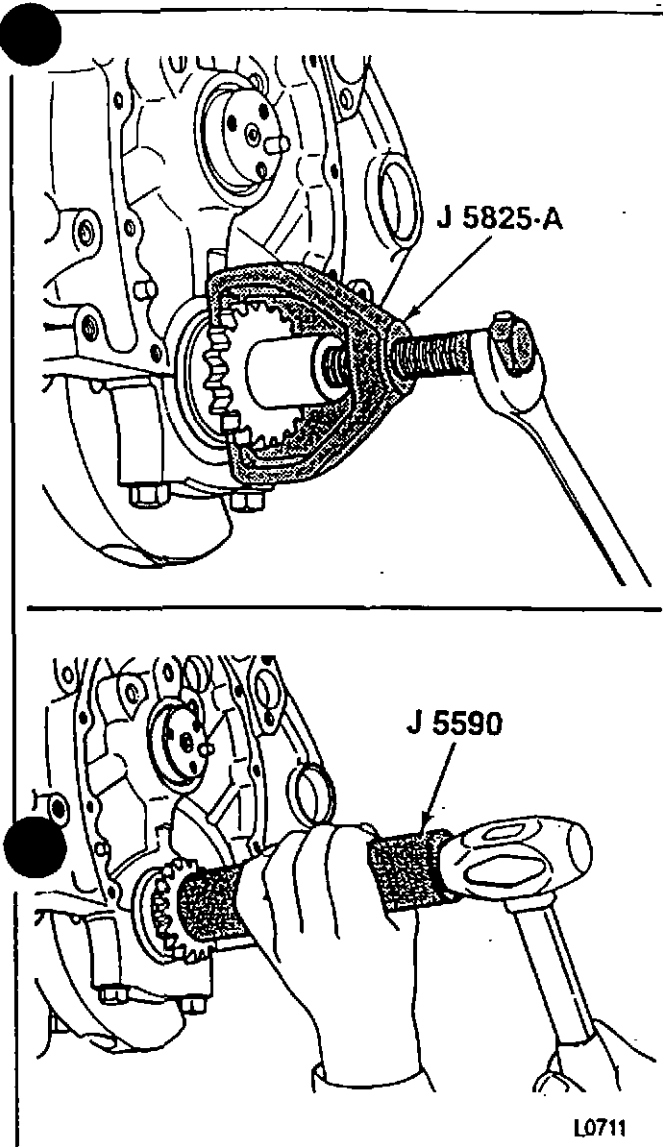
Crankshaft Sprocket Replacement (5.0L and 5.7L Engines)
